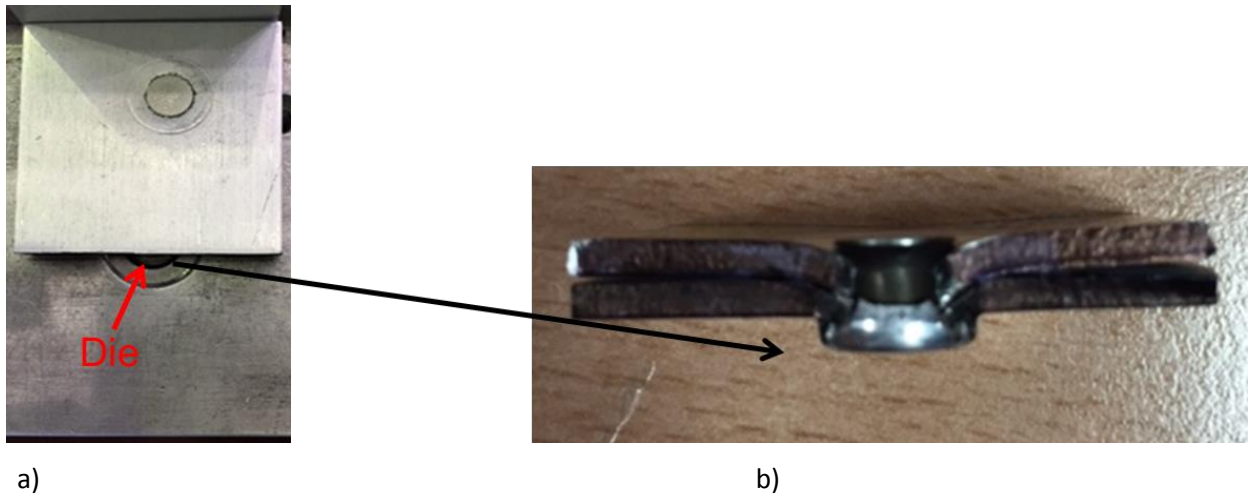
Experimental procedures a) Coupons placed on the top of the die before riveting. b) Coupons with rivet inserted on half section
